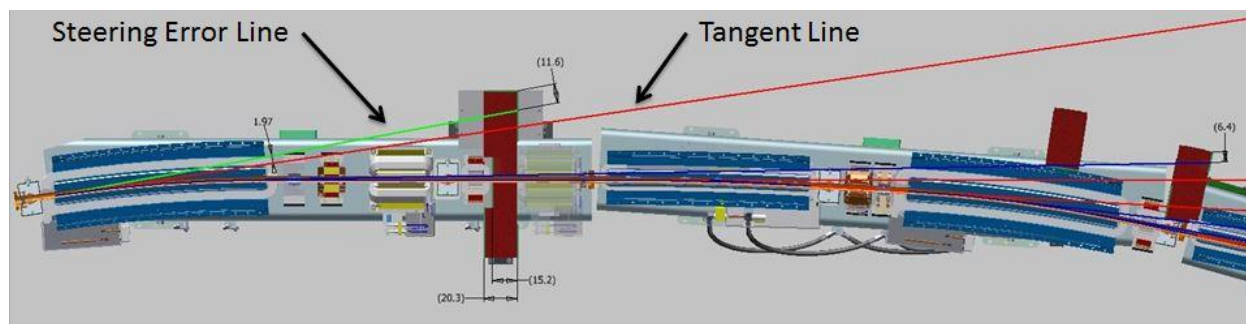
Dipole steering angle trace lines were drawn on the assembly model sketch plane to locate shields.
